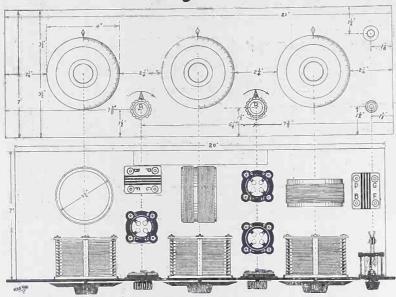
, the panel layout and assembly plan for Rofpatkin's 3-Tube Reflex for the Novice.
